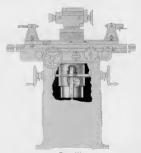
A Cut-away Front View Showing Bottom of Wheelhead Pile Column
